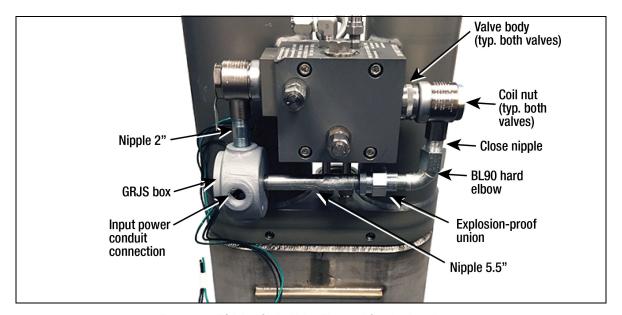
FC Inlet/Outlet Valve Electrical Conduit Installation
